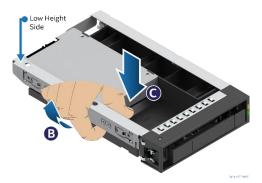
2.5" Drive Mounting Bracket Removal from Drive Carrier (Step 2)
